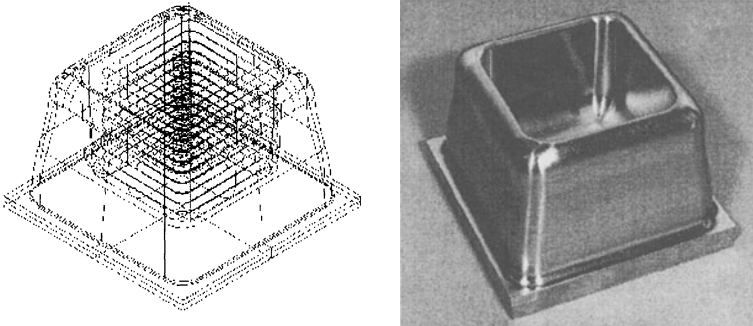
Example of HSC-appropriate pocket machining and mould produced by milling
